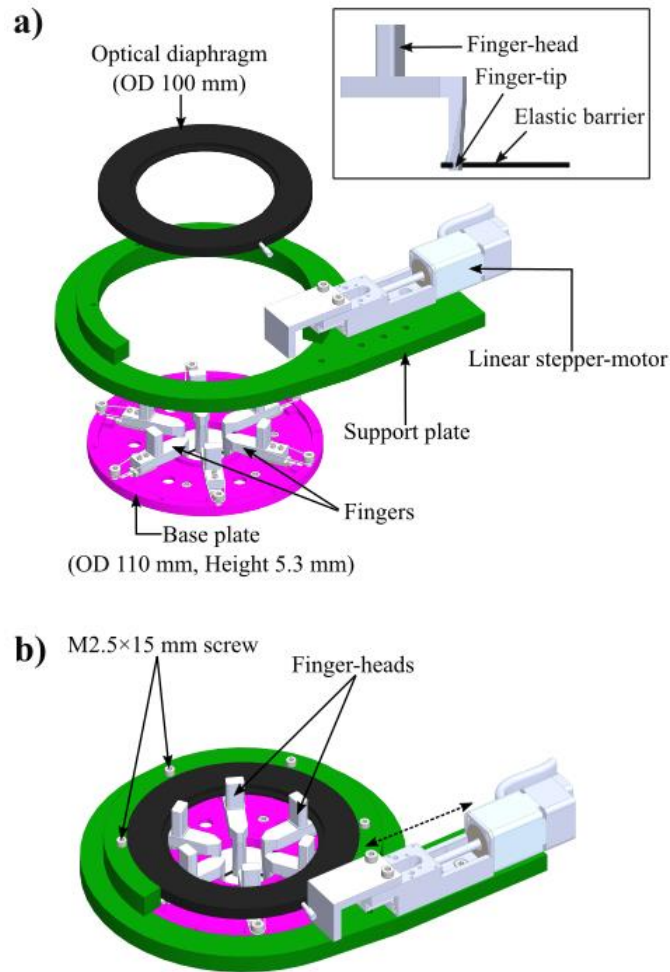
Schematic representation of compression assembly. a) Exploded view: Base plate holds six fingers that support the elastic barrier at each finger-tip. Inset shows schematic side-view of a single finger and the position of the elastic barrier. Support plate couples the base plate and optical diaphragm and holds a linear stepper-motor that actuates compression. OD stands for outer diameter. b) Assembled view: Support plate is fixed to the base plate with M2.5×15 mm screws while the optical diaphragm is in compression fit. Optical diaphragm surrounds the finger-heads and is actuated by the stepper-motor. The dashed, double-arrow line indicates the motion of the stepper-motor. The optical diaphragm further actuates the finger motion and thus the elastic barrier position.
